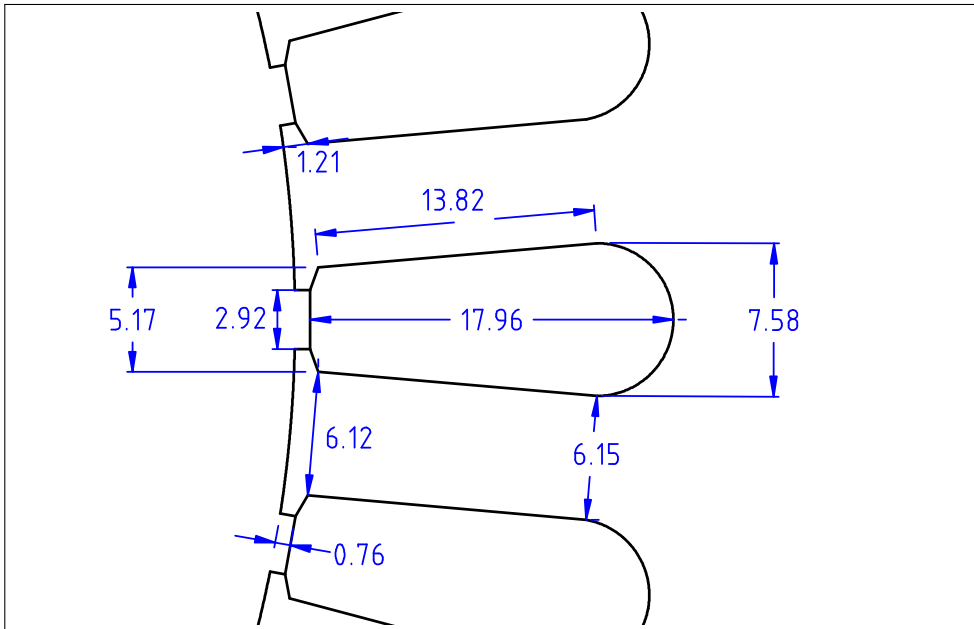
Stator slot dimensions of the 7.5 kW industrial induction motor
